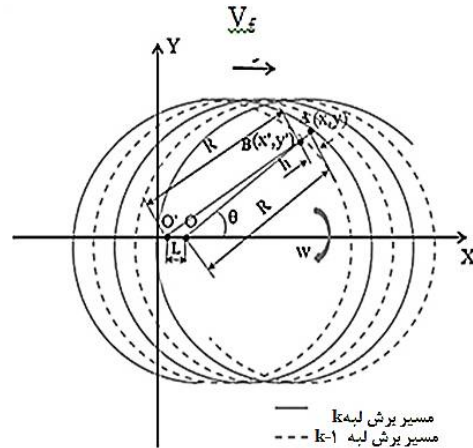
Tool movement path for $k, k-1$ edge and nondeformed chip thickness in up milling.
